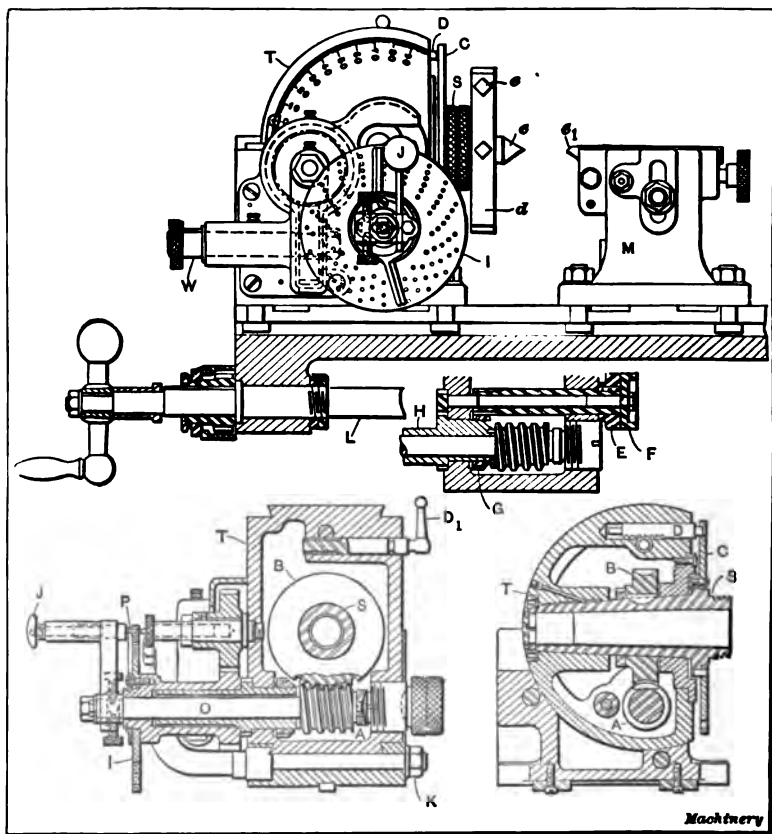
Spiral Head Used for Spiral Milling and Indexing
